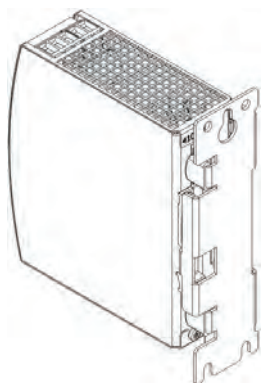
Front View of the Wall/Panel Mount Bracket.
